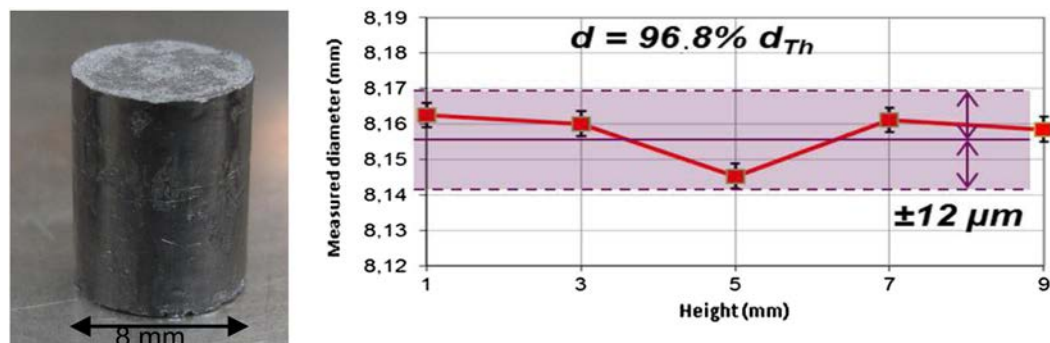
Photograph of a fuel pellet fabricated by the injection moulding process; diameter profile of a fuel pellet.
